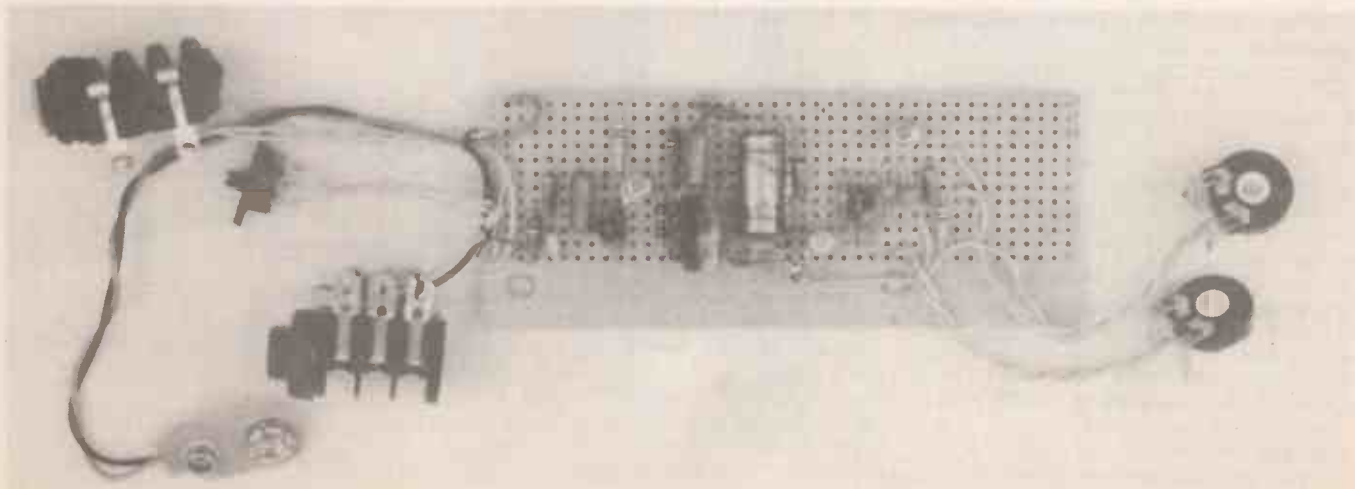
Interwiring to all off-board components. The soldered connections at each end of resistor R15 should be covered with insulation tape.
